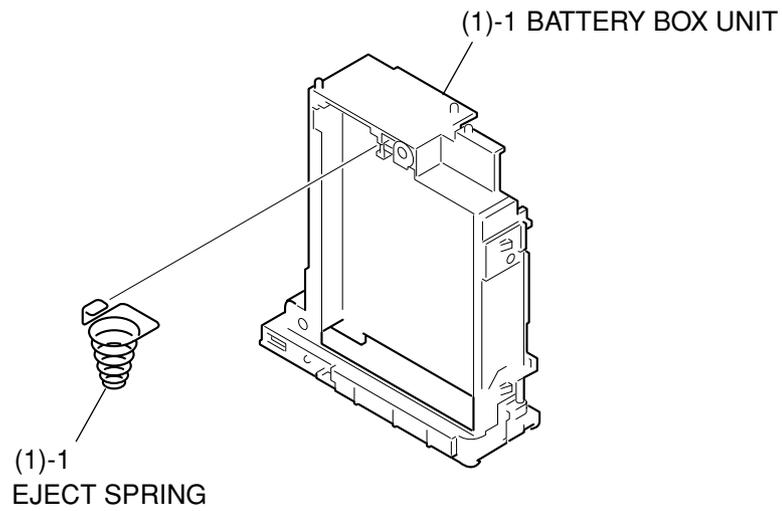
BATTERY BOX UNIT, EJECT SPRING
